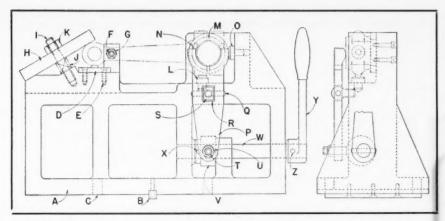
Drawing of a boring fixture designed to be used for boring the two holes in the connecting rod shown in Fig. 1
